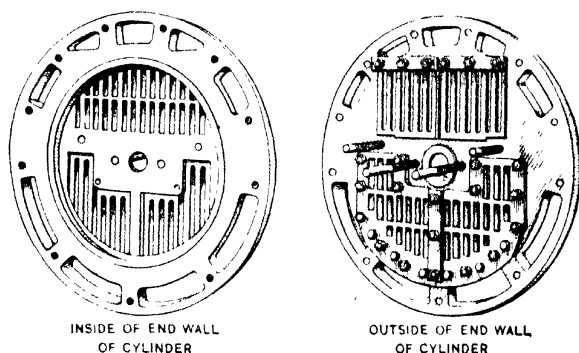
Sullivan Plate Valves in Place on Inner Head of Low-Pressure Cylinder, Angle-Compound Compressor, Class "WJ 3."
